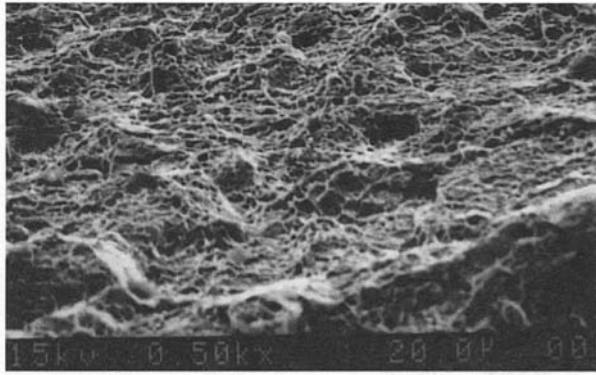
Dimpled fracture surface of fatigue test specimen
